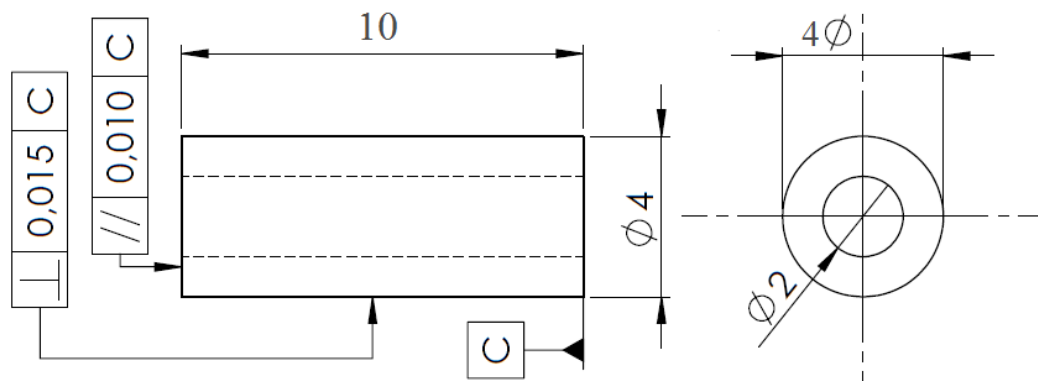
Technical drawing of the dilatometer test specimens used to determination of the CCT and also M_s and M_f temperatures
